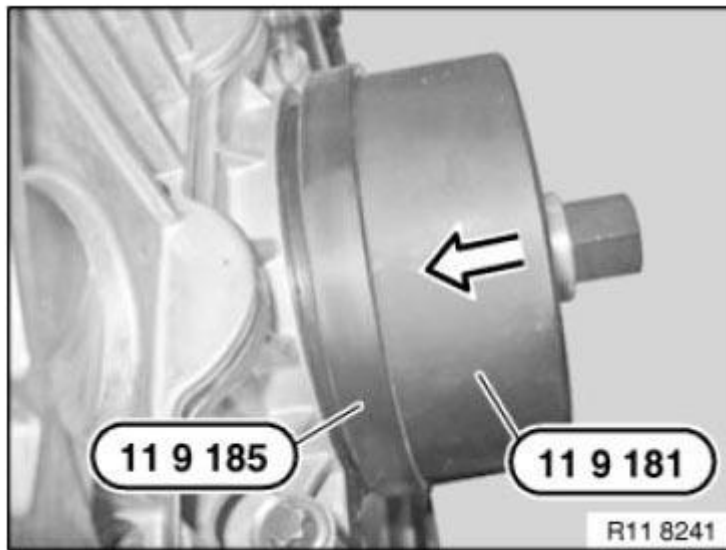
Pulling Radial Shaft Seal Using Special Tool 11 9 181/11 9 185/11 9 183
